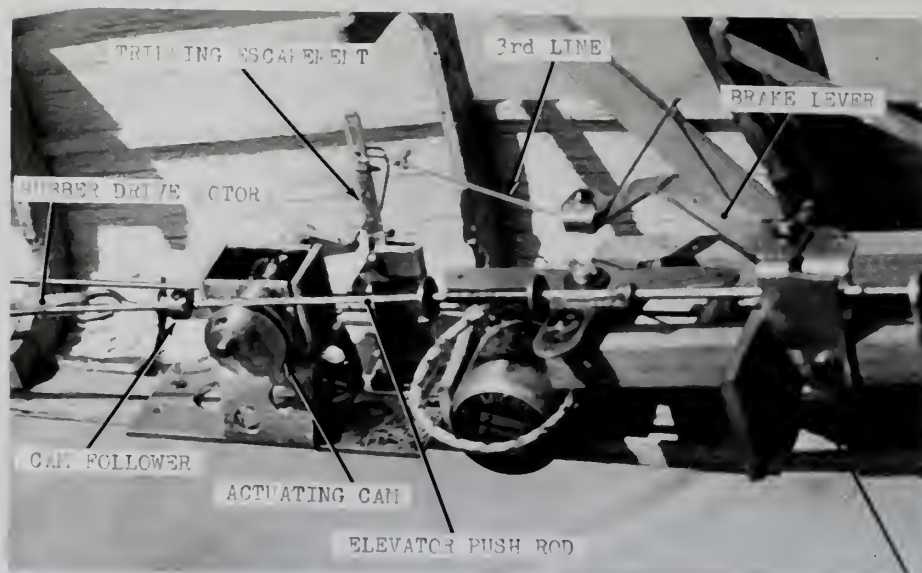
VIEW FROM RIGHT SIDE BEFORE ASSEMBLY
